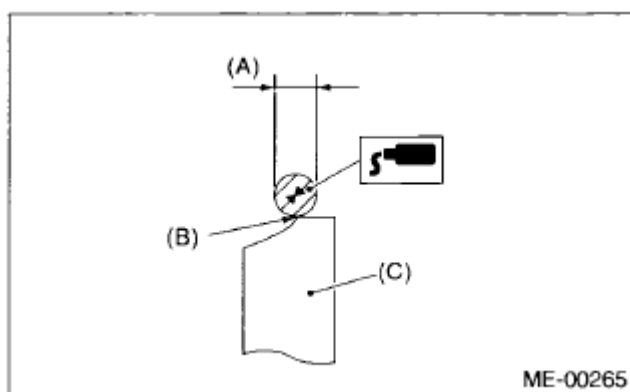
Applying Coat Of Liquid Gasket On Camshaft Cap Mating Surface
